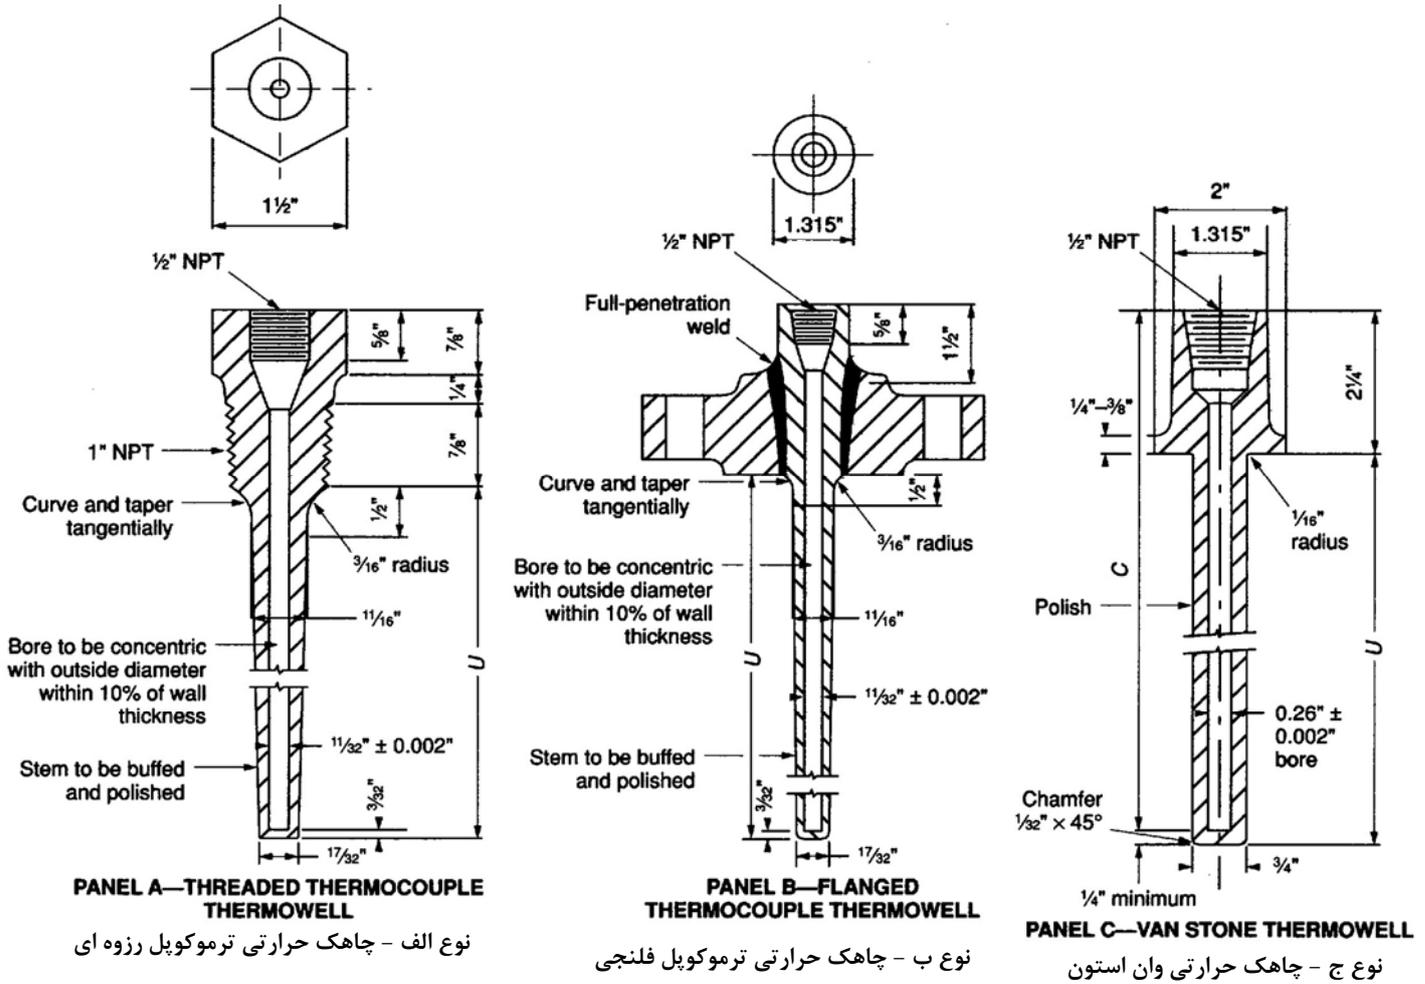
THREADED, FLANGED AND VAN-STONE THERMOWELLS
